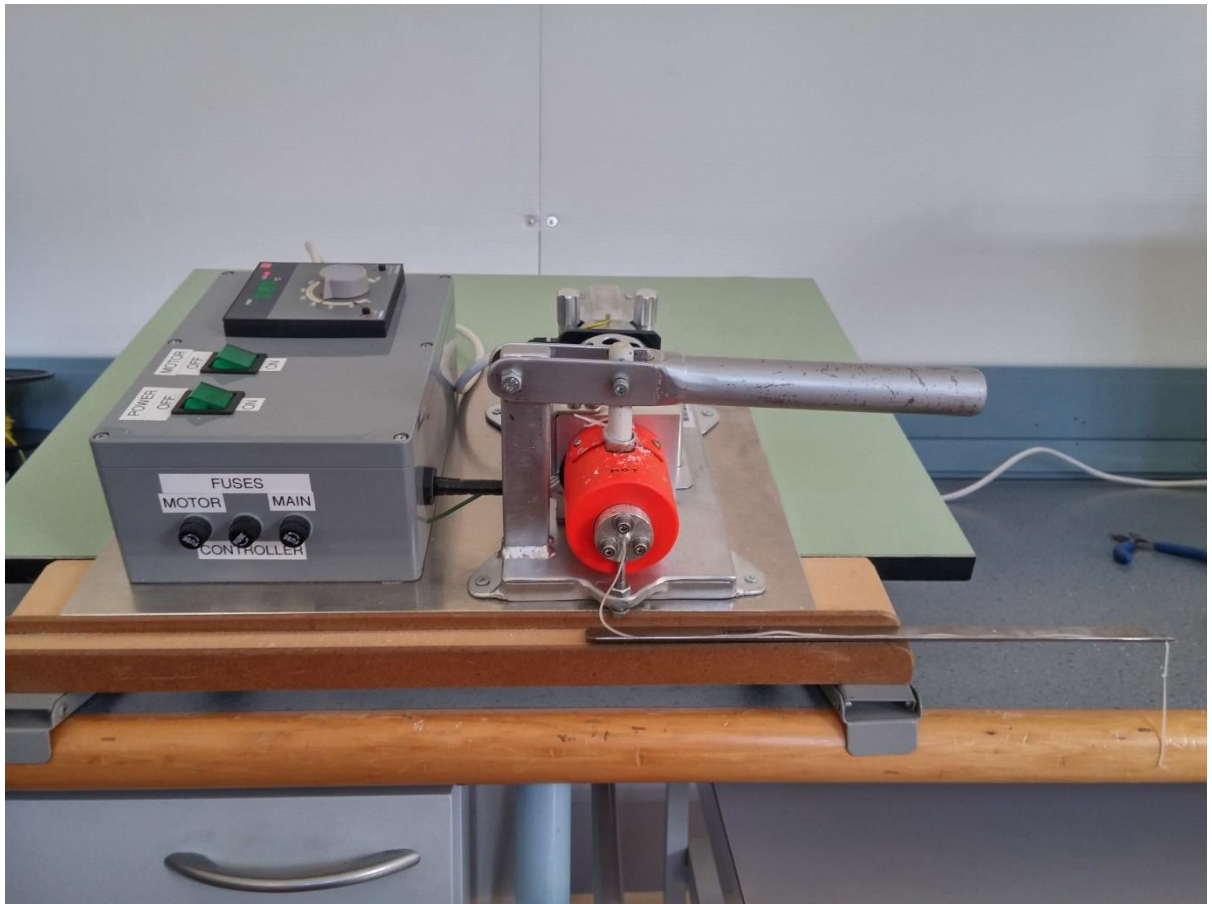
1 Extrusion using the 1 mm diameter single screw melt extruder.
